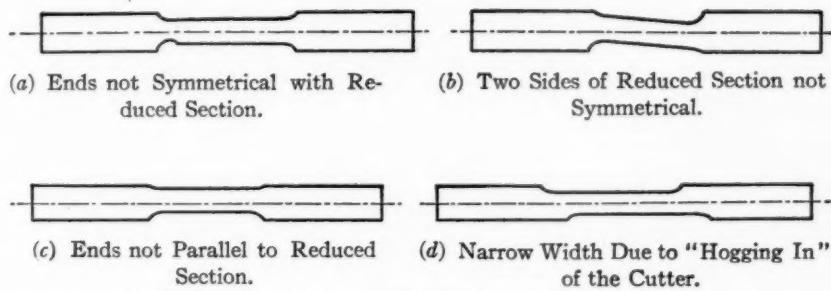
Common Errors in Preparation of Plate or Sheet Metal Test Specimens.
